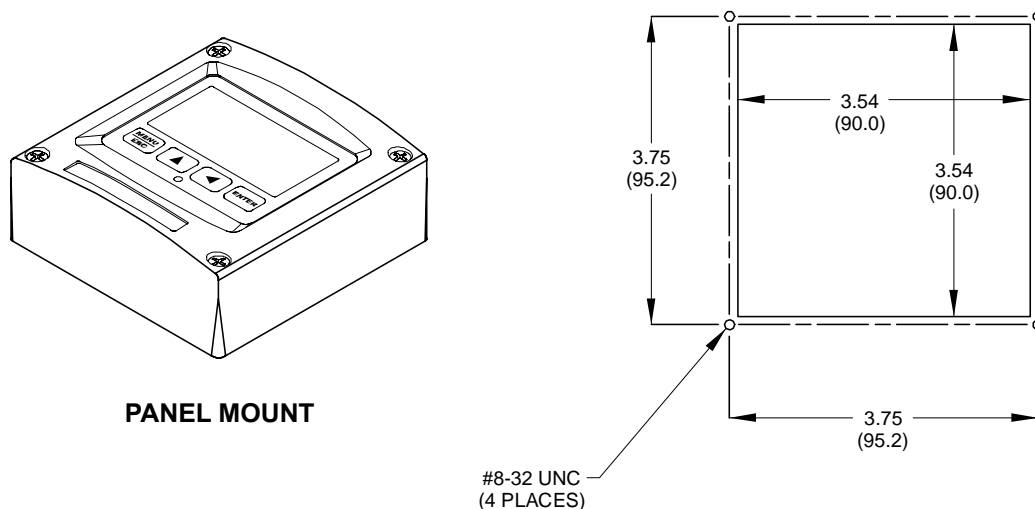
2-Wire Panel Mount and Cut-out (ATI-0661)
